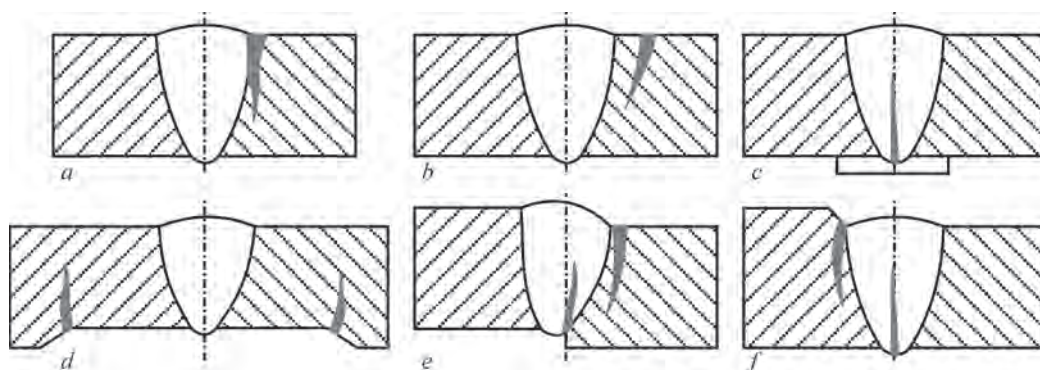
Typical damages of welded joints of steam pipelines: *a* — creep crack in the region of HAZ fusion; *b* — creep crack in the region of partial HAZ recrystallization; *c* — fatigue crack at the weld root near the backing ring; *d* — fatigue crack in the places of contact of pipe elements of different thicknesses; *e* — fatigue crack at displacement of steam pipeline pipes welded abutt; *f* — fatigue crack in welded joints of different thicknesses
